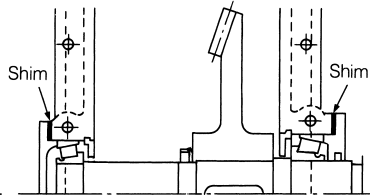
DF Arrangement whose Clearance is Adjusted by Outer Rings.
